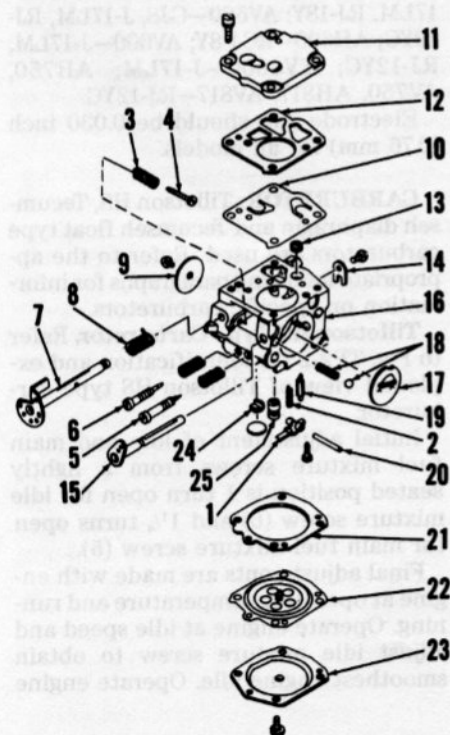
Exploded view of Tillotson HS diaphragm type carburetor used on some models.
